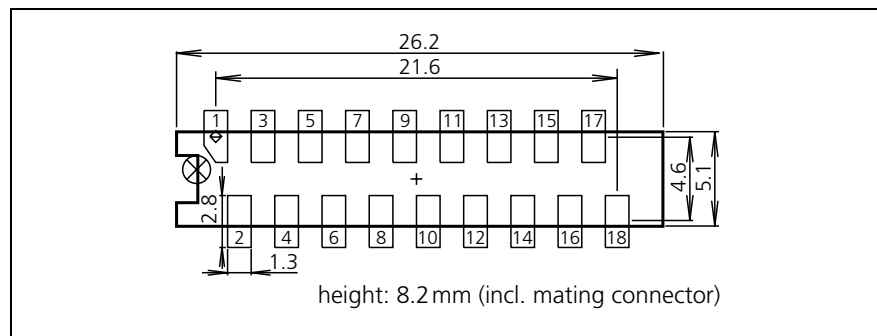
Footprint of 18-way Micro-MaTch socket, SMD, PCB-mount
